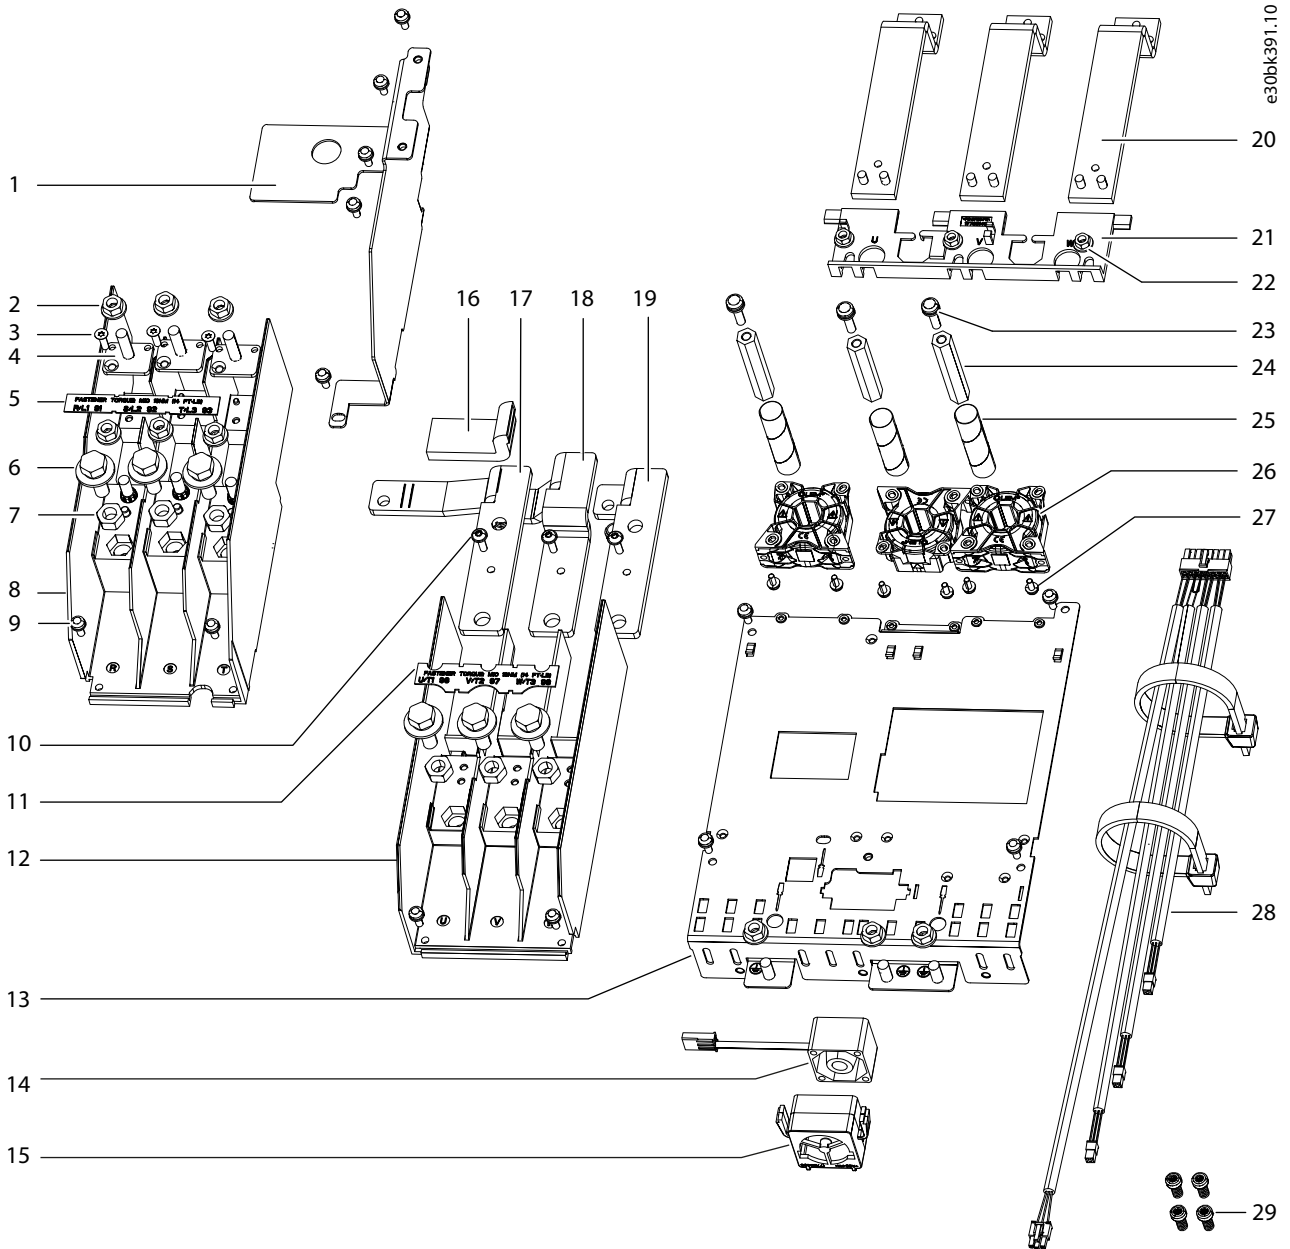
Exploded View and Parts List of 300 A Current Sensor Kit
